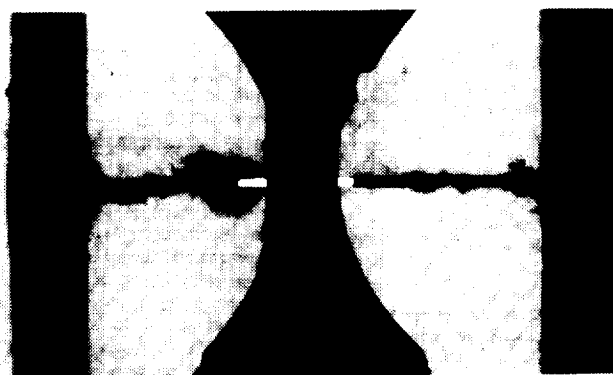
Fracture arrest results for tension buffer strip panels with 3.2 mm wide and 0.61 mm thick buffer strips.
